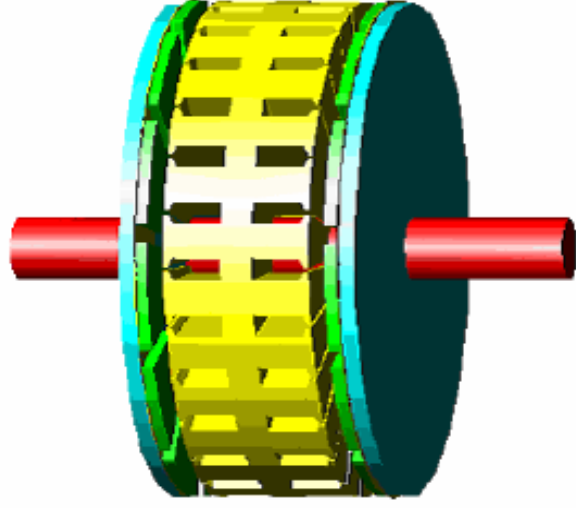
Small single-stator-double-rotor AFPM machine topology. (after [2])
